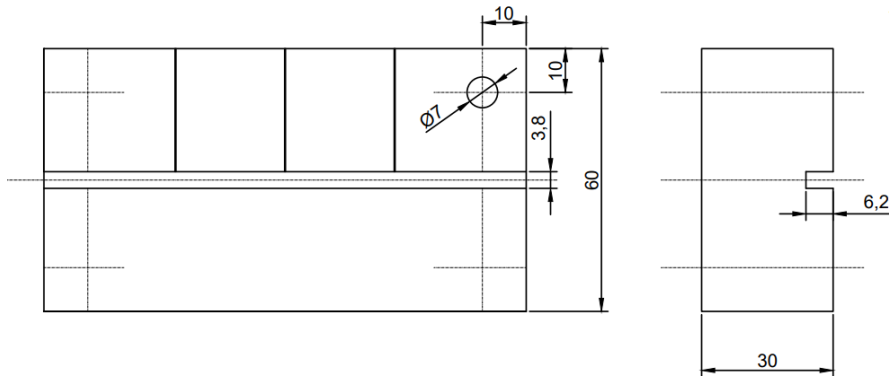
The drawing of the lower part of the slot emulator with the slot dimensions.
